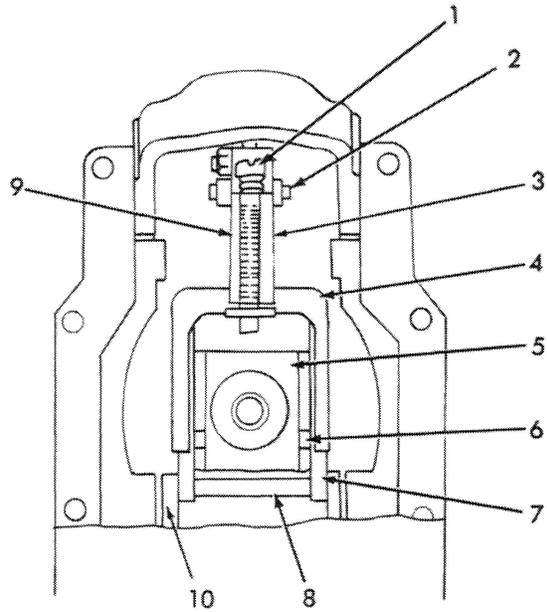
Adjustable Fulcrum Lever (T-72725)
